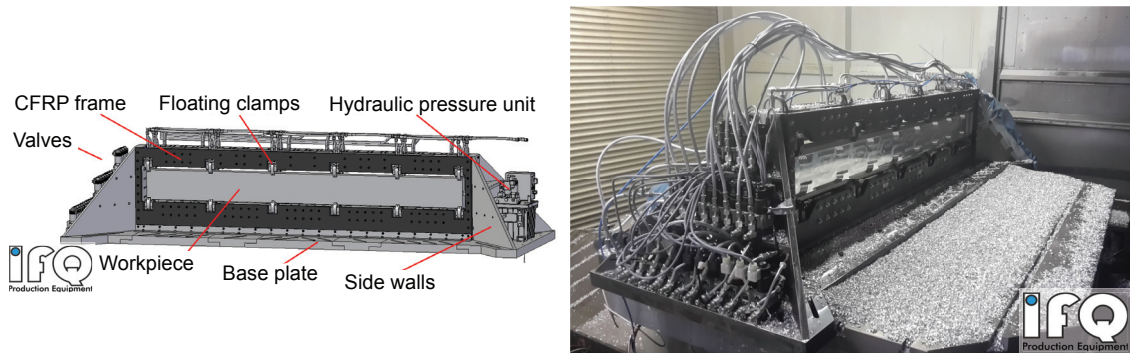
Hydraulic clamping system for reducing part distortions (IFQ, Magdeburg).
